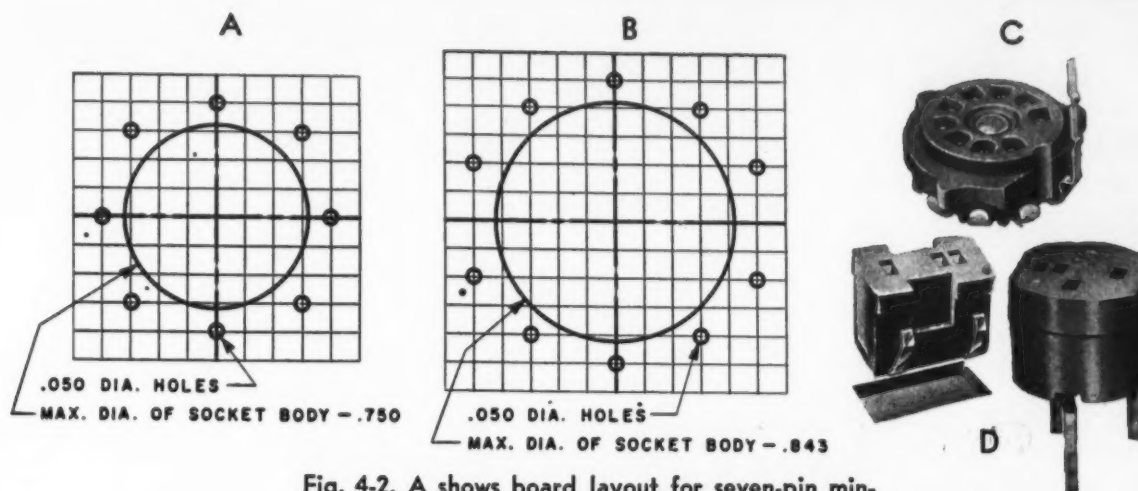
A shows board layout for seven-pin miniature tube socket. B shows layout for nine-pin socket. C shows the socket that receives the nine-pin tube and mounts on the board. D shows similar sockets for transistors. (Photos courtesy ELCO)
